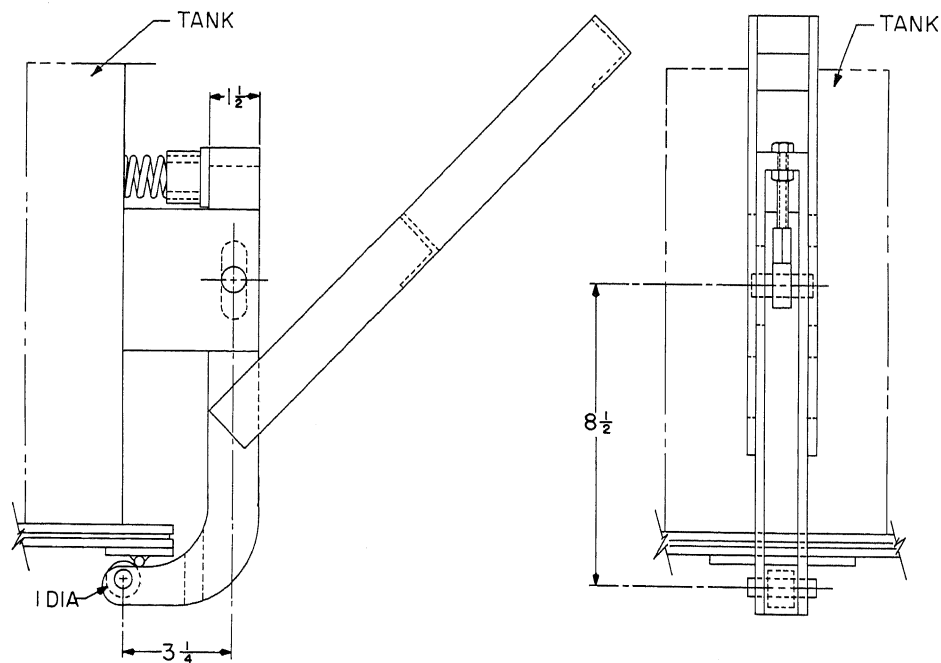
Latch details of receiver door. Dimensions are in inches.
